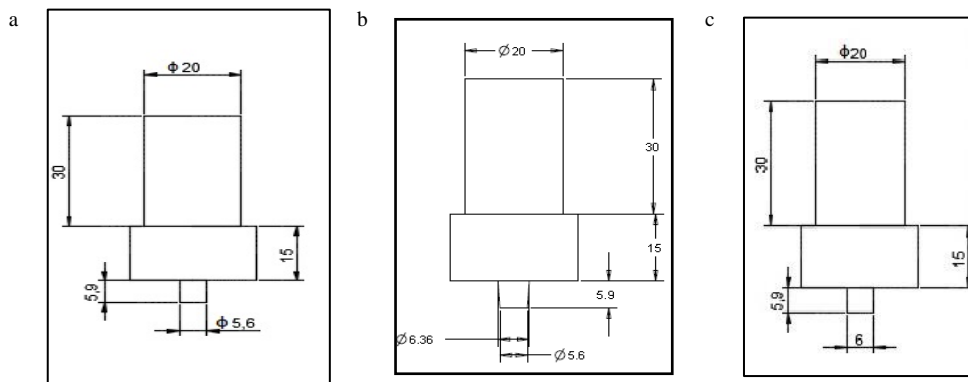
Different tool configuration and dimensions of tool (all the dimensions are in mm). (a) Cylindrical pin tool; (b) Tapered pin tool; (c) Square pin tool.
